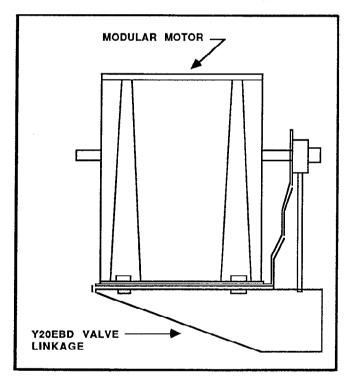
MOUNTING MMR TO JOHNSON Y20EBD VALVE LINKAGE
